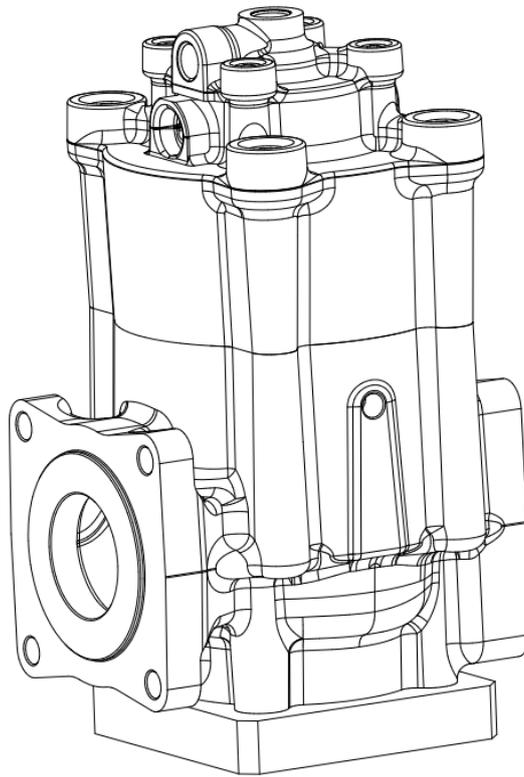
CO 3 way pneumatic valve size 2" (see Section12 for details about pneumatic connection)
